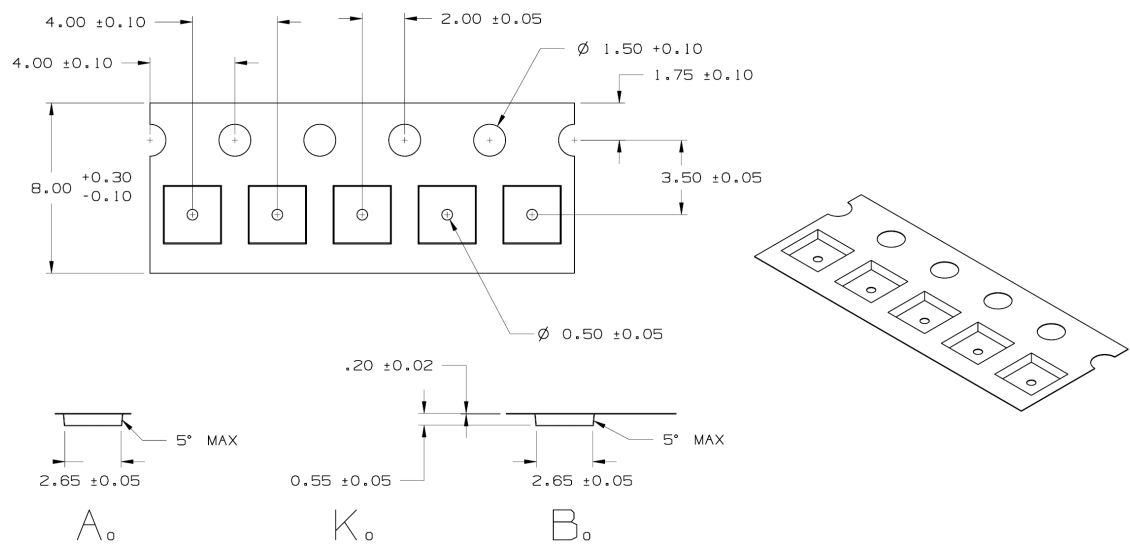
CSP19, packing Information (drawing and dimension [mm])
